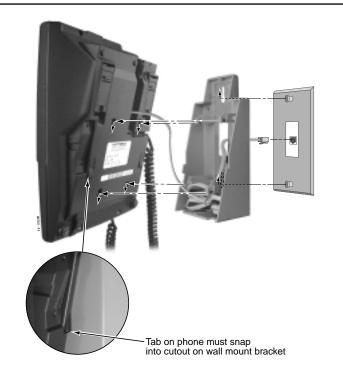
MOUNTING ON A WALL PLATE 4-20
